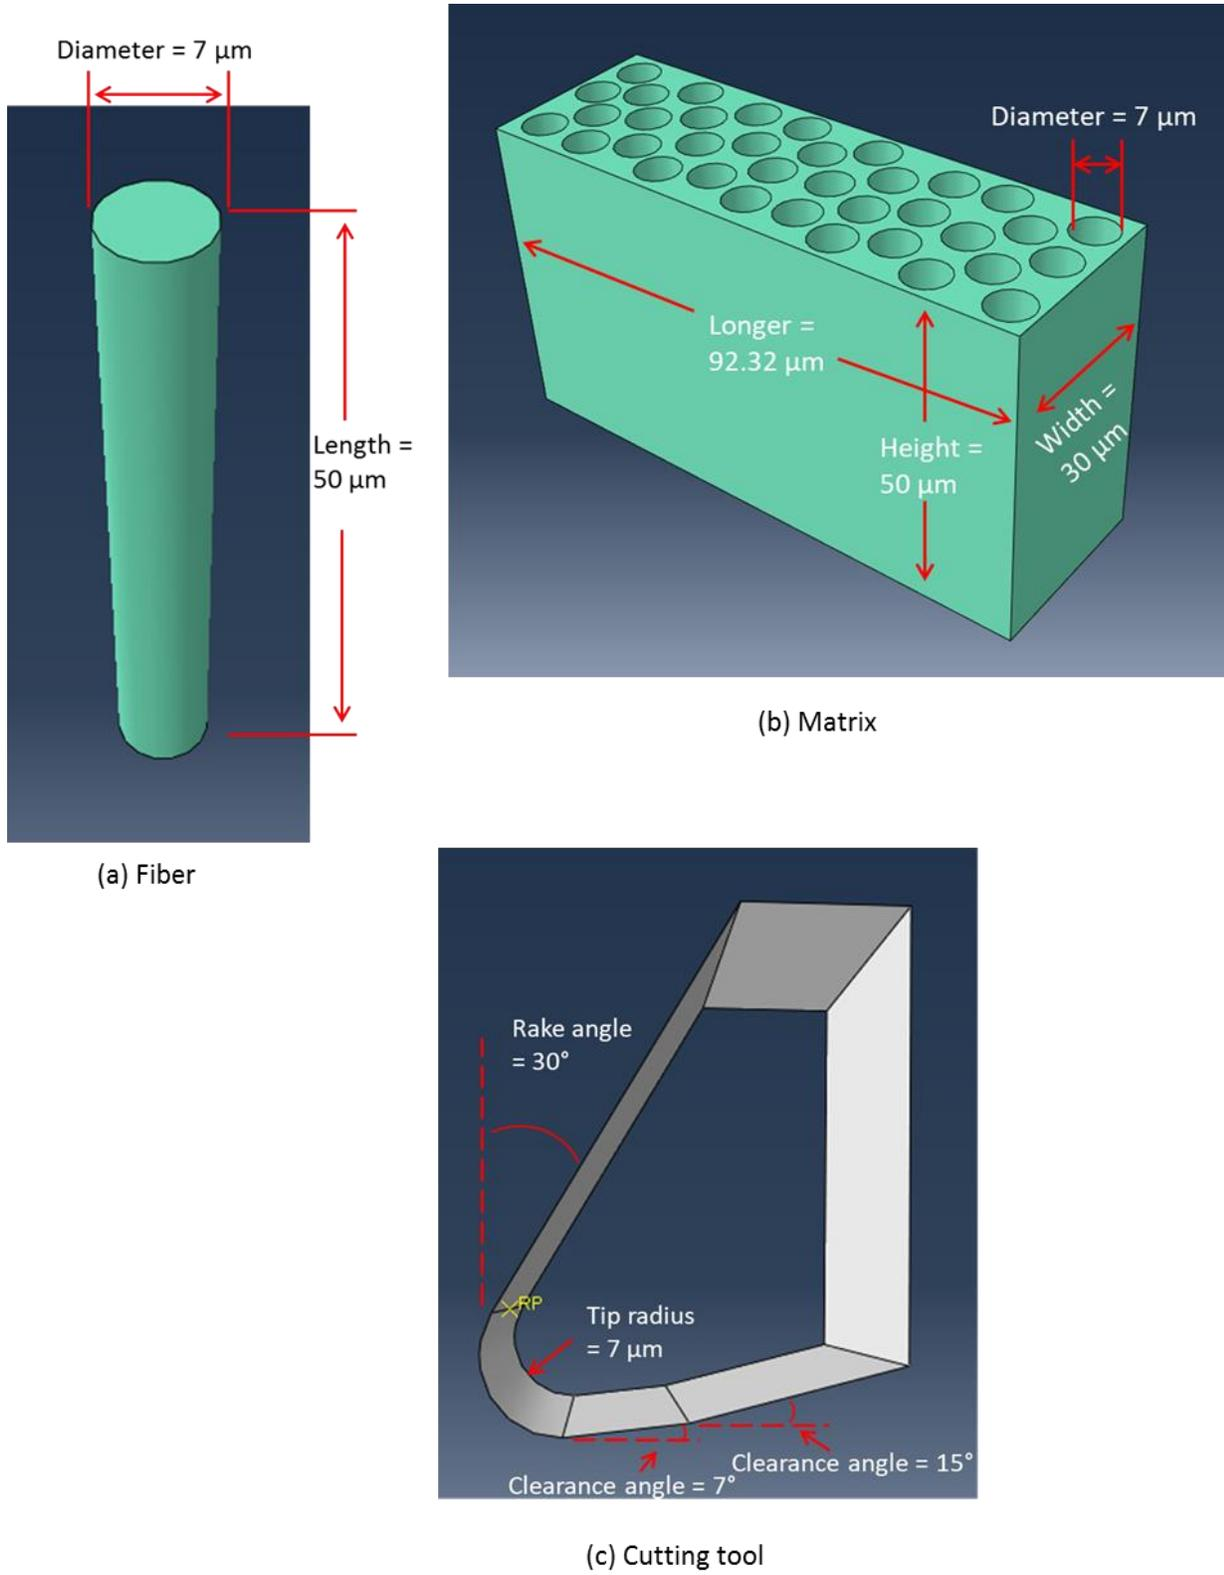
Parts of the model, (a) fiber, (b) matrix, (c) cutting tool
